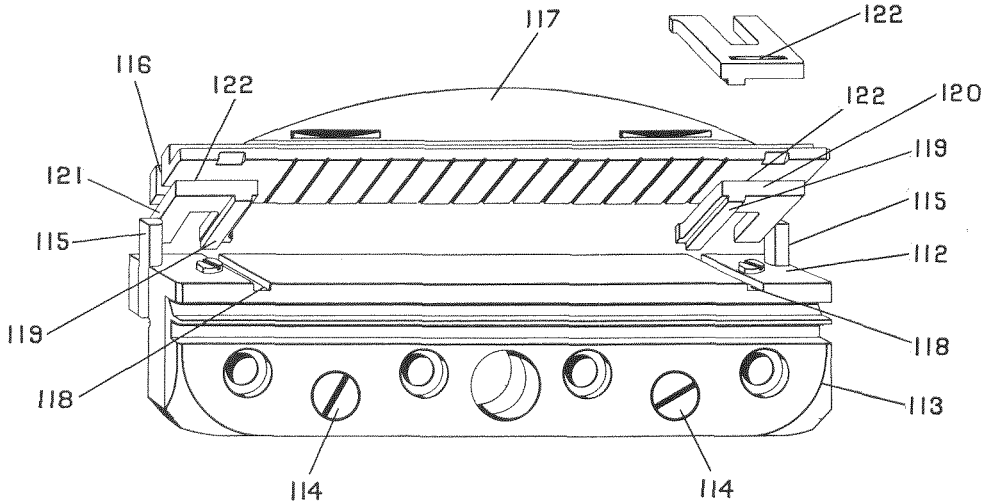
View of the mold. 112 is the mold body. On this mold body is a separate piece having a groove in it, 113, which is called "the keeper". The keeper is fastened to the mold by screws 114. The mold is fastened to the disk by four screws, the holes for which are shown. At each end of the mold body are two upright posts 115. These posts fit into two notches 116 at each end of the mold cap 117. The mold body has also in it two grooves from front to rear 118. These grooves are for the purpose of affording a seat to a projecting rib 119 upon the liners 120 and 121.
